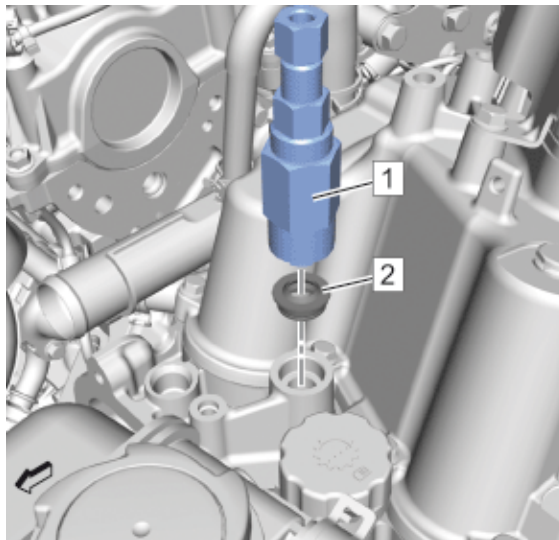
Manual Shift Shaft Seal And Removal Tool Outer Part
